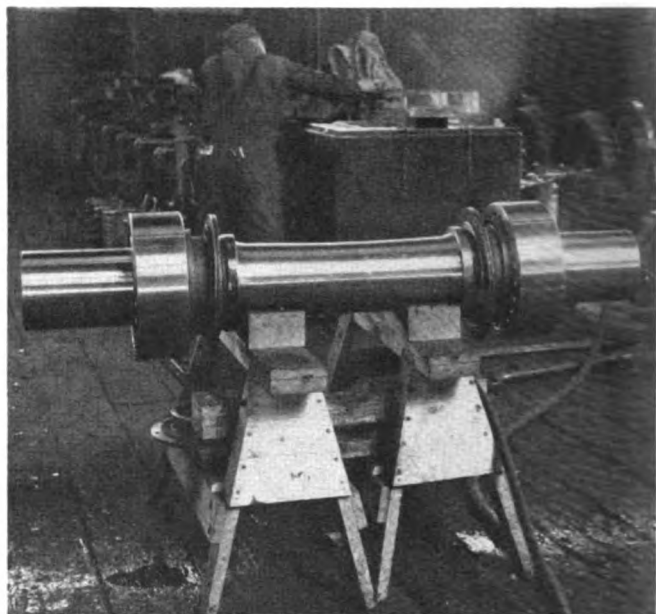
Engine truck axle just after the application of SKF roller bearings which have been expanded slightly in the 300-deg. F. oil bath shown in the background
